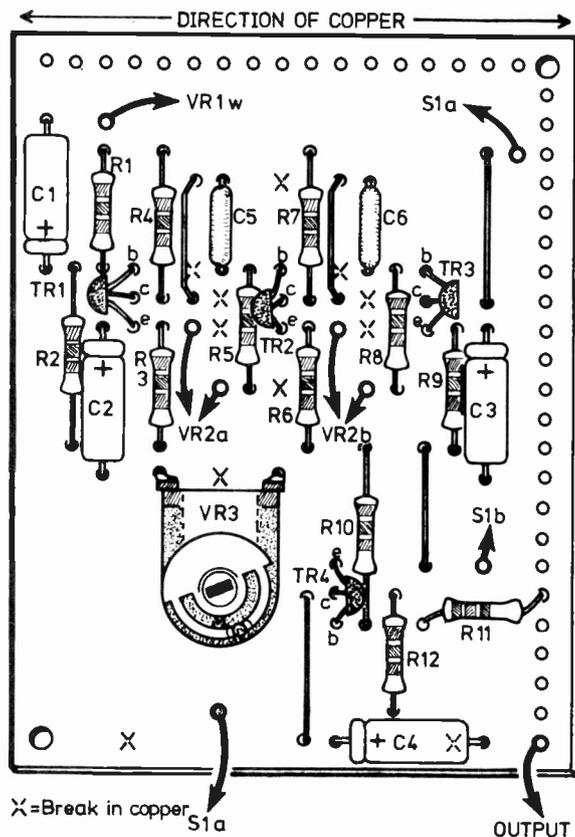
Component layout and wiring on 0.1in matrix Veroboard
